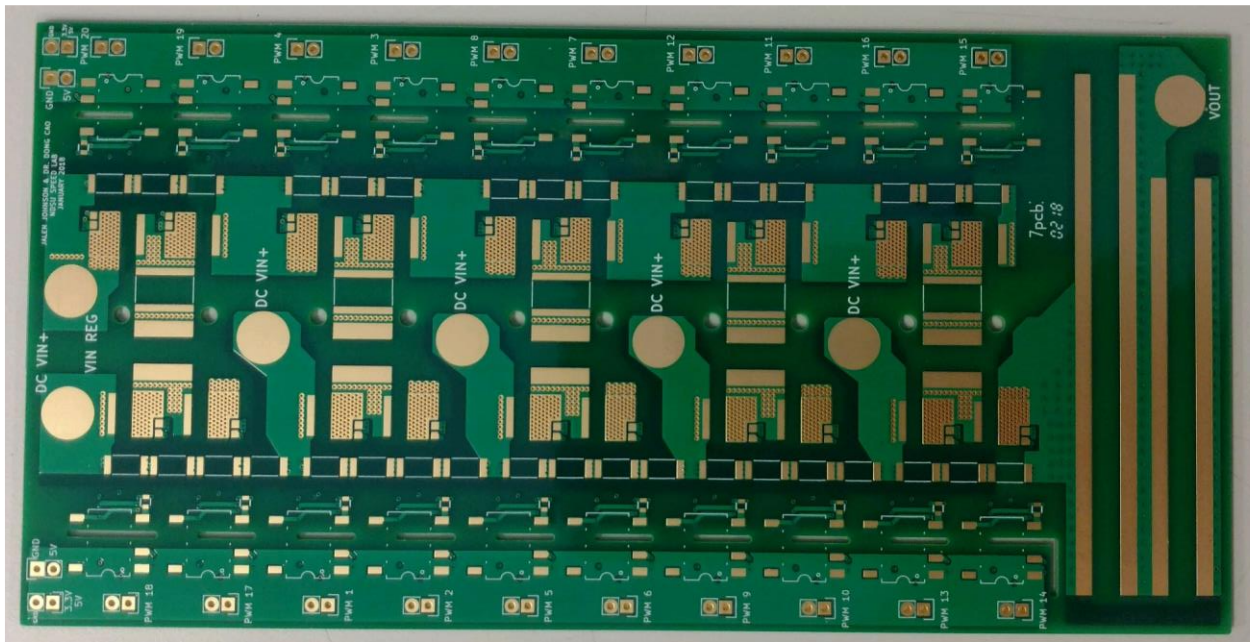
RMMC DCX PCB Top Side Bare Board
